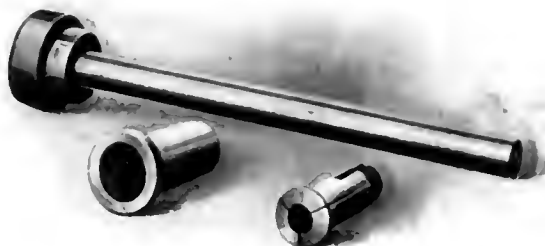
The Draw Bar, Collet and Sleeve used for holding end mills and similar tools
